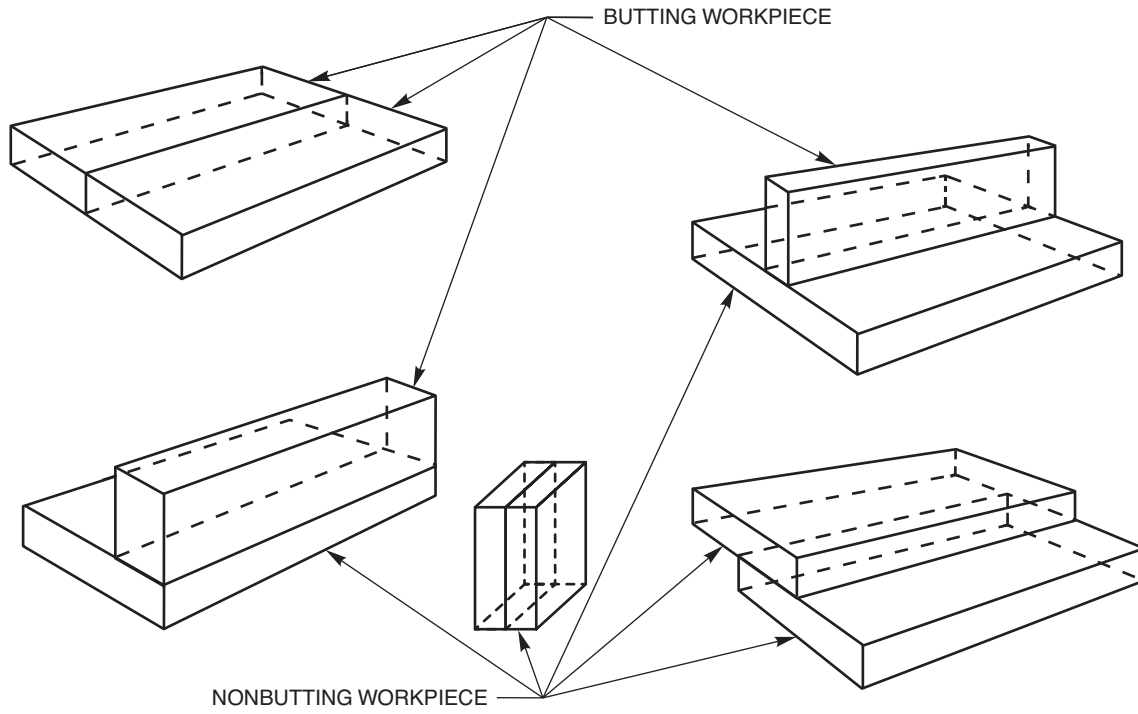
Butting and Nonbutting Workpiece or Workpieces
